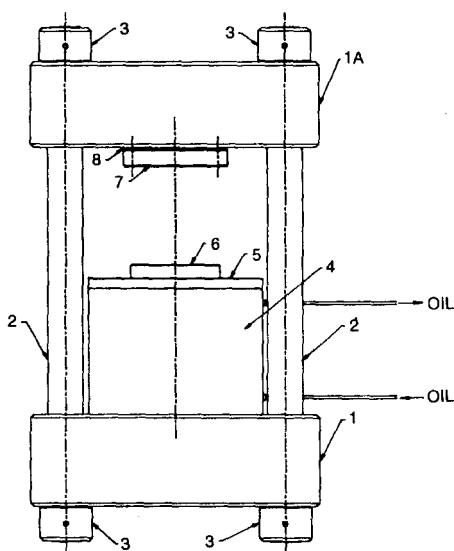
Schematic of the details of the assembly of the 600-ton press.
